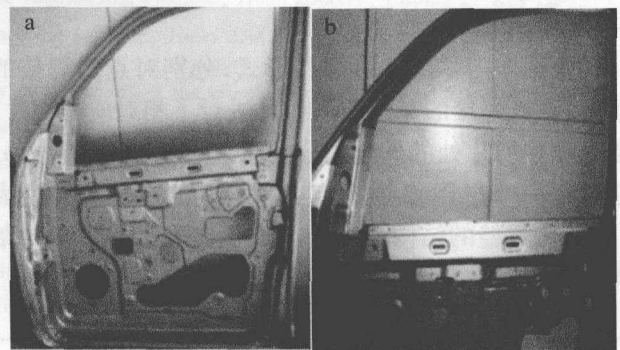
a—laser welding of door b—spot welding of door
